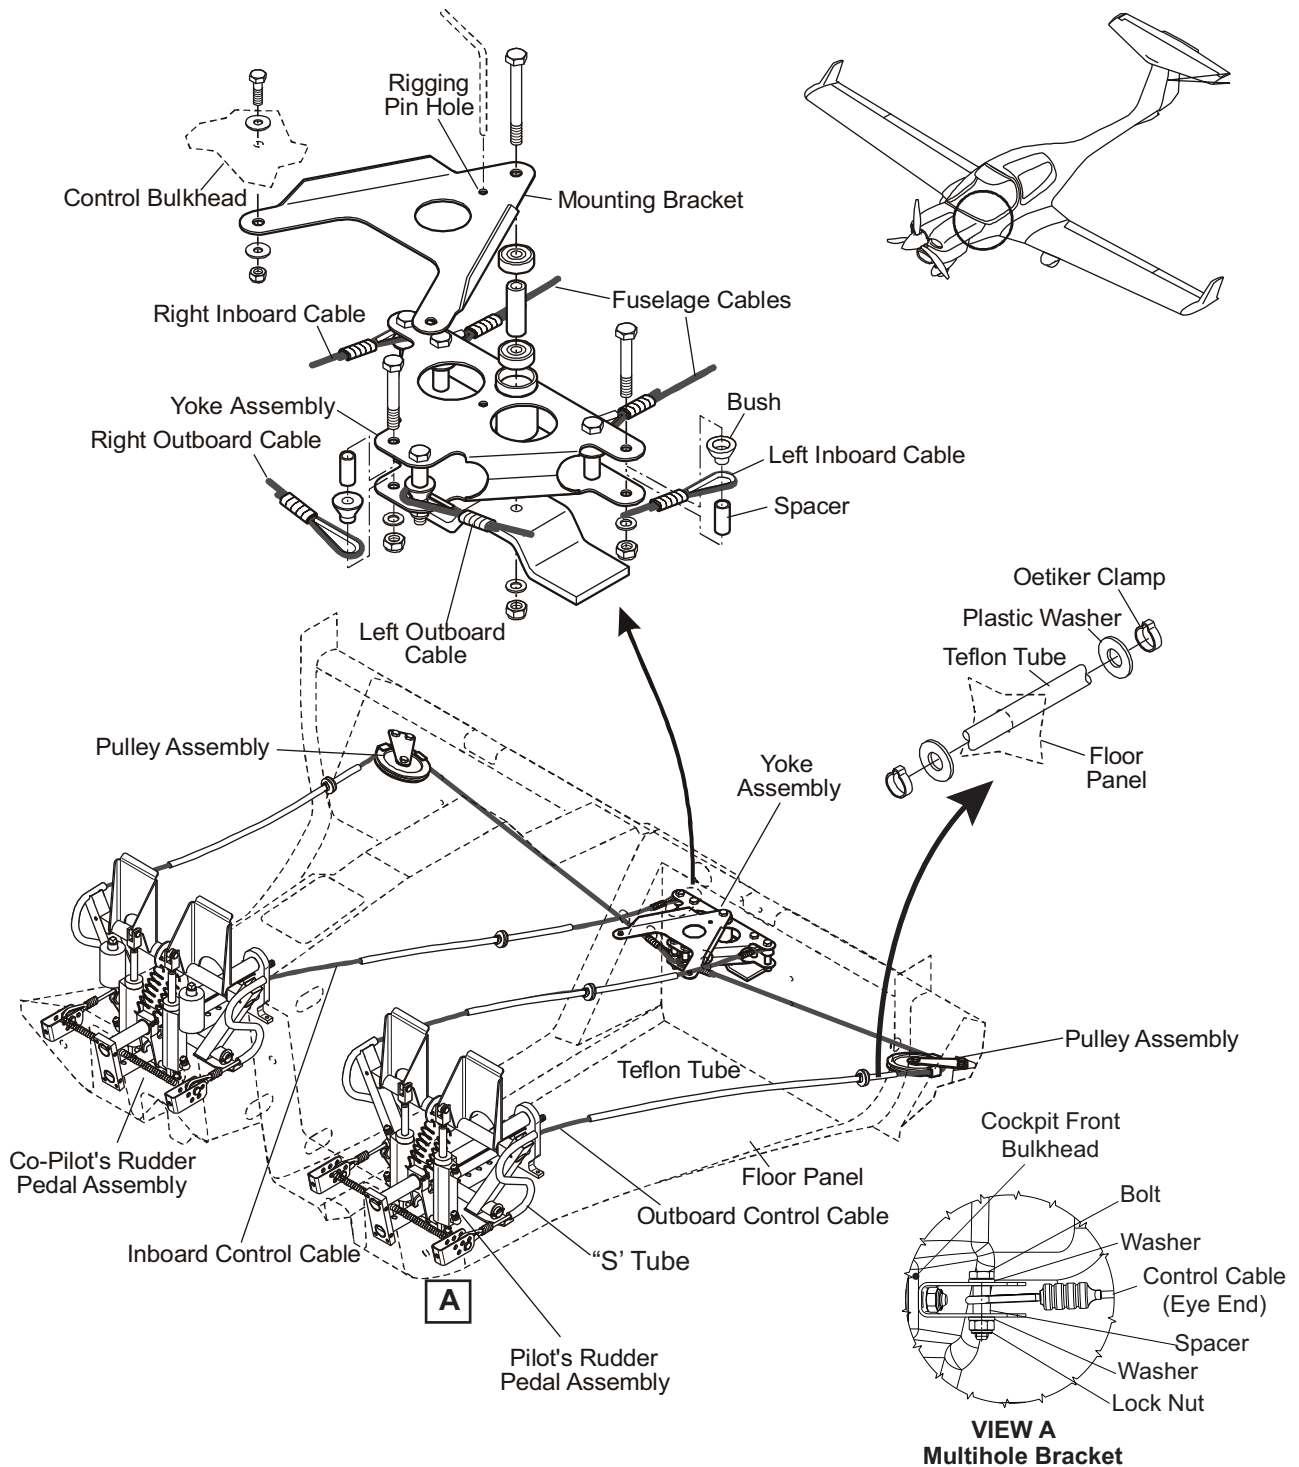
Rudder Control-Cables (from the Bulkhead to the Yoke Assembly) - Removal/Installation
